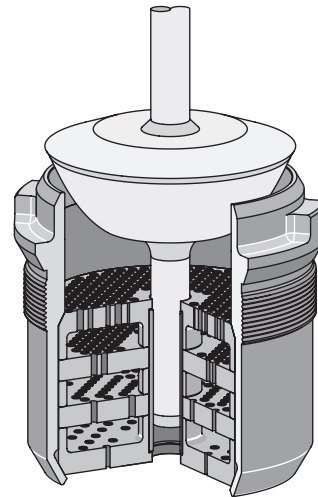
Sectional drawing of AC-2 trim with four attenuation plates
